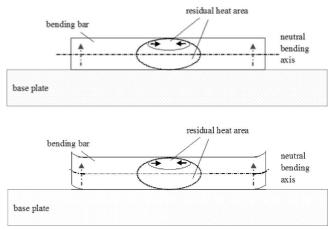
Reasons for defects (delamination and cracks) occurring during selective laser sintering.
